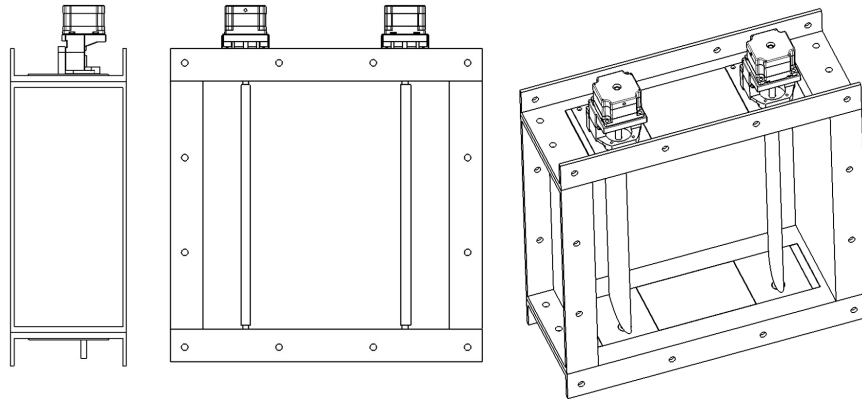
CAD drawing of the gust generator system. Side, front and isometric views respectively.
